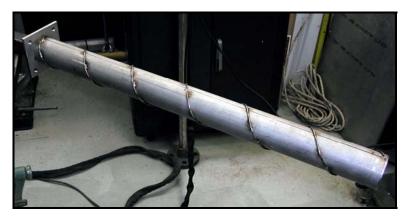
Construction of the long heat exchanger with helical rod welded in place
